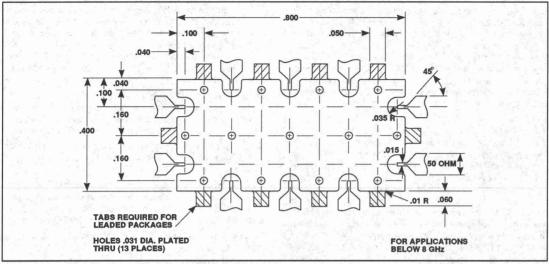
4 x .8-inch PlanarPak Board Layout
